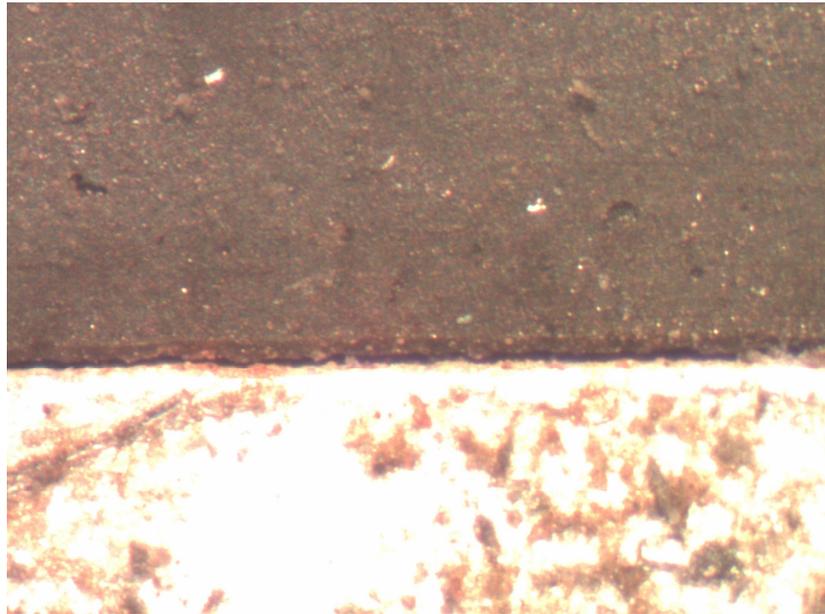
150°C Epoxy 1 on FR4 Test Board Aluminum Edge Crack
